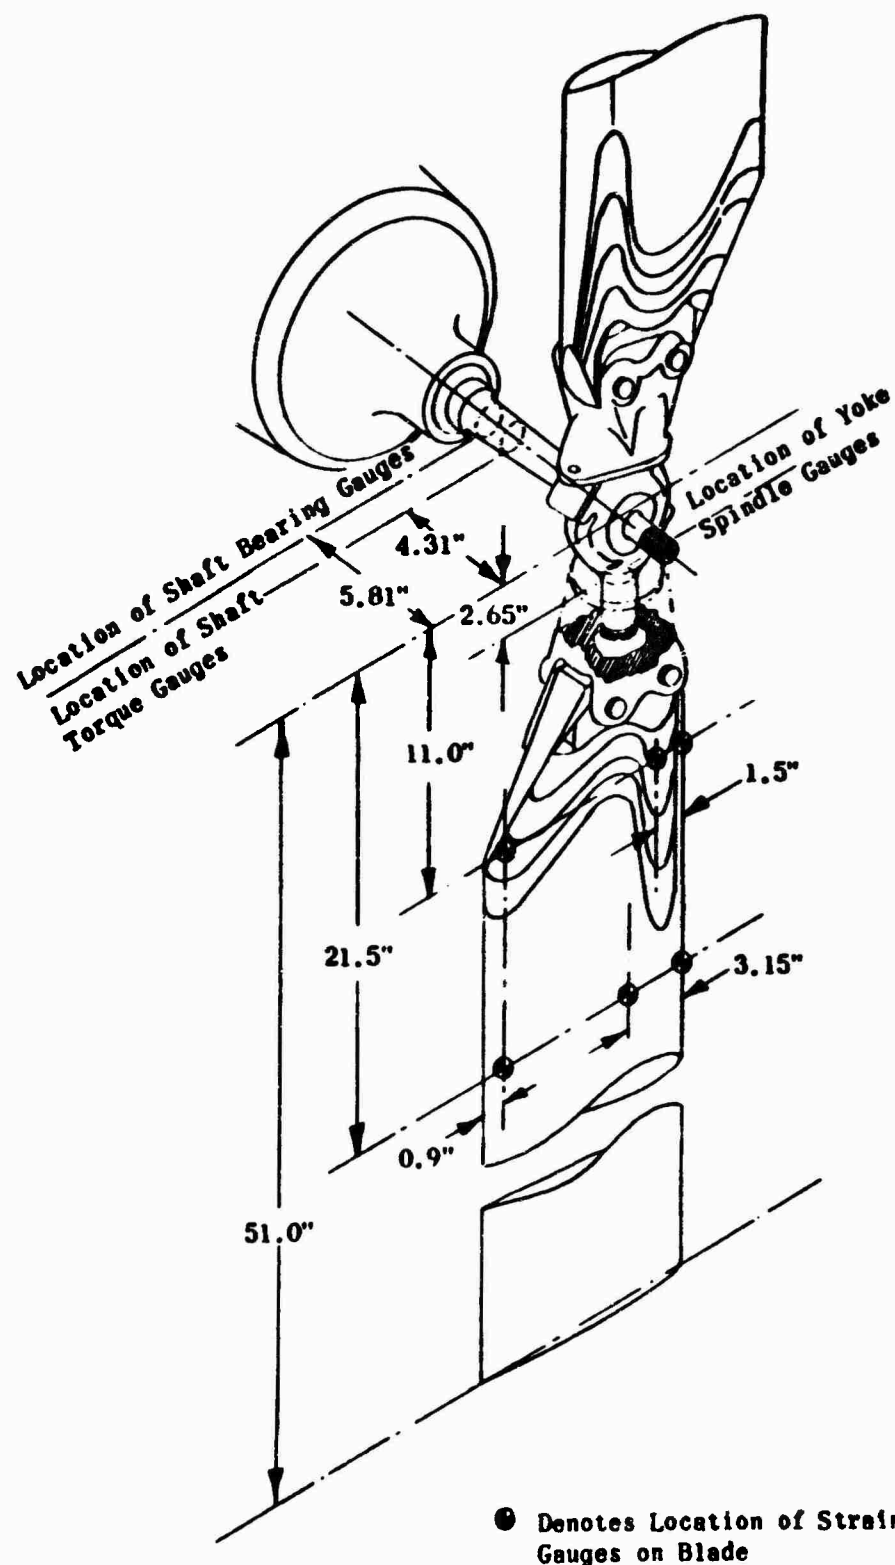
VIEW OF TAIL ROTOR ASSEMBLY
